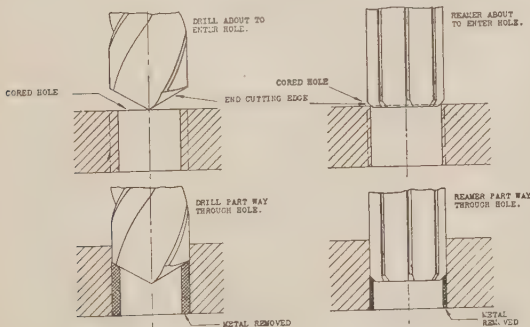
SIMILARITY OF CUTTING ACTION OF A TWIST DRILL AND A MACHINE REAMER
